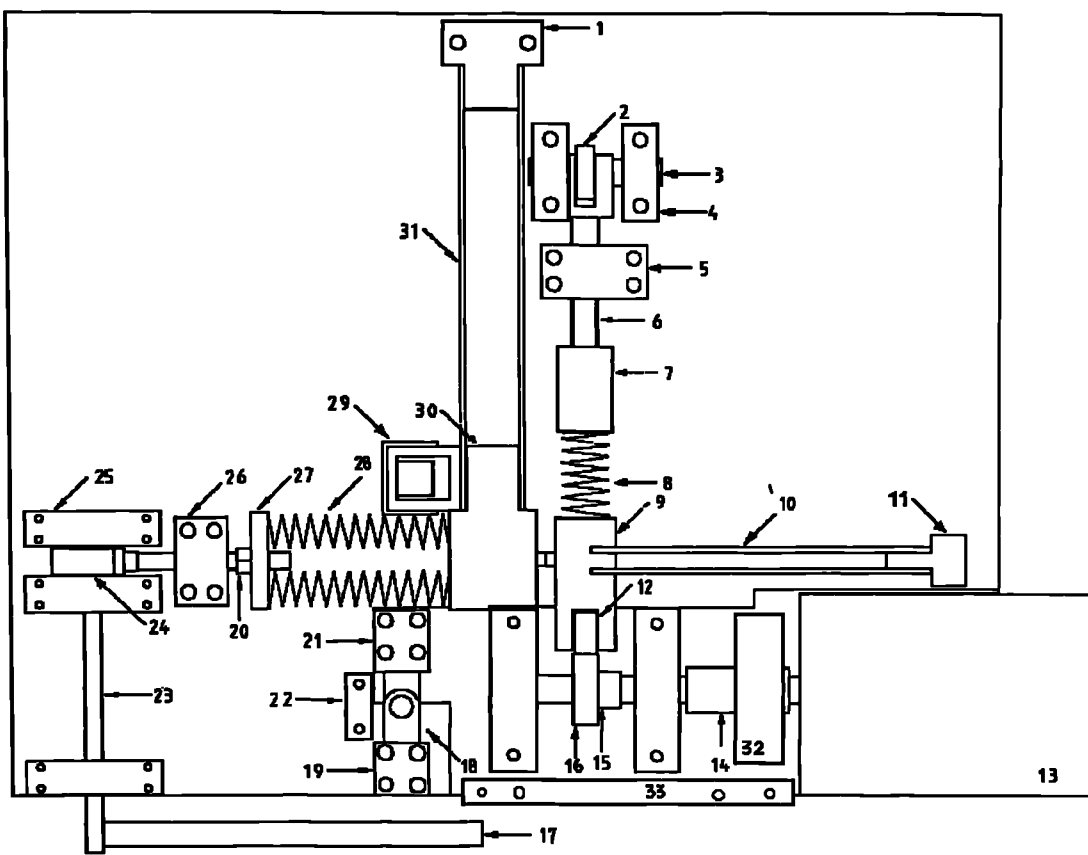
Schematic General Assembly Of First Linear Friction Welding Rig (Garton,1987)
